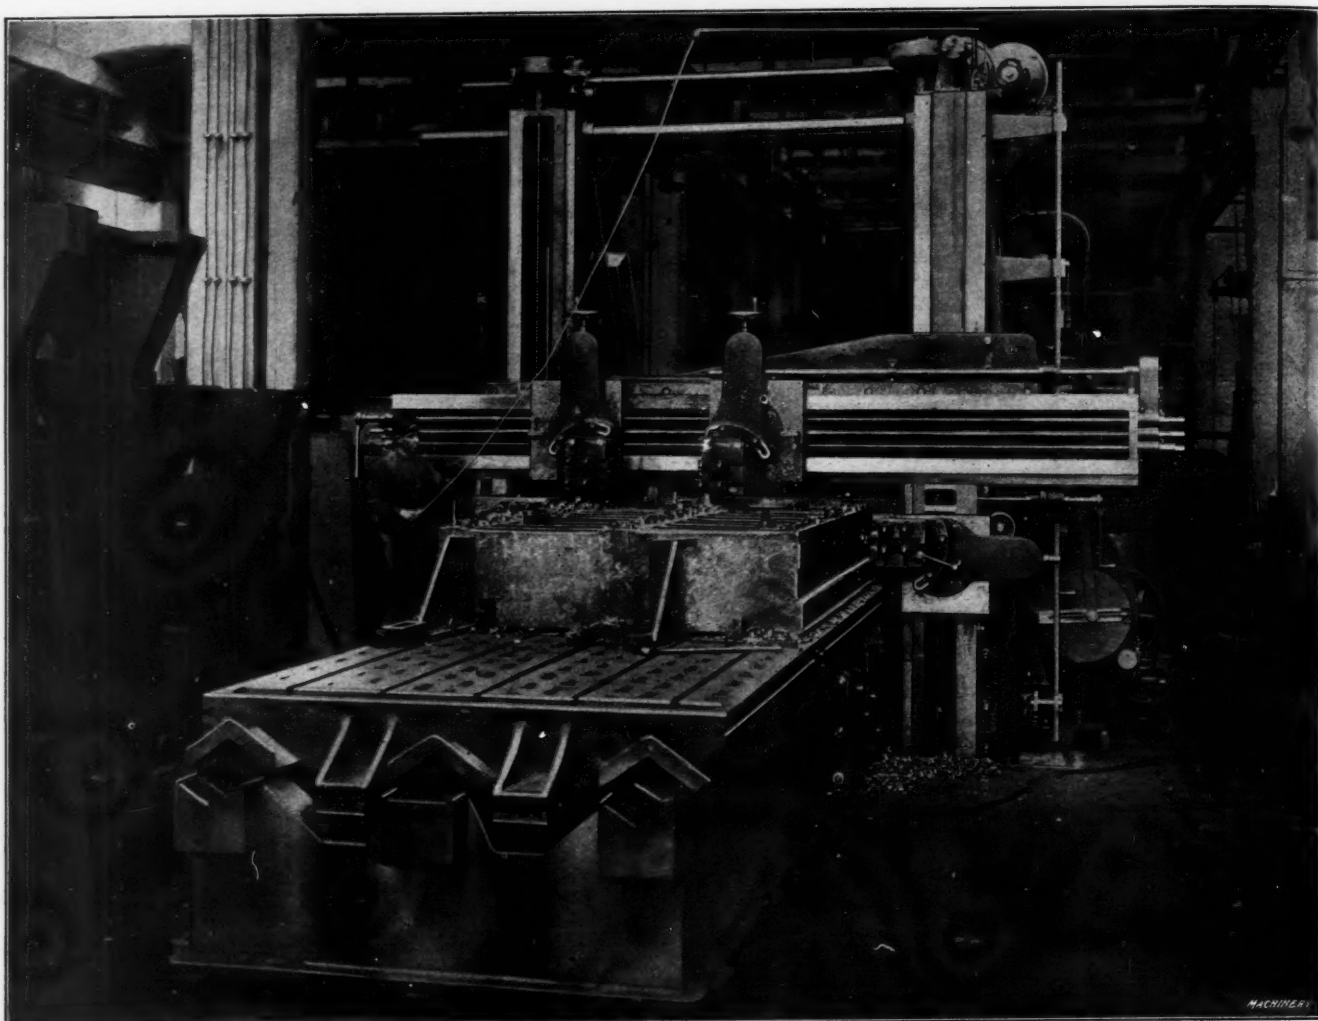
Machine with Auxiliary Housing in Place, converting it into the Equivalent of a Standard Planer
